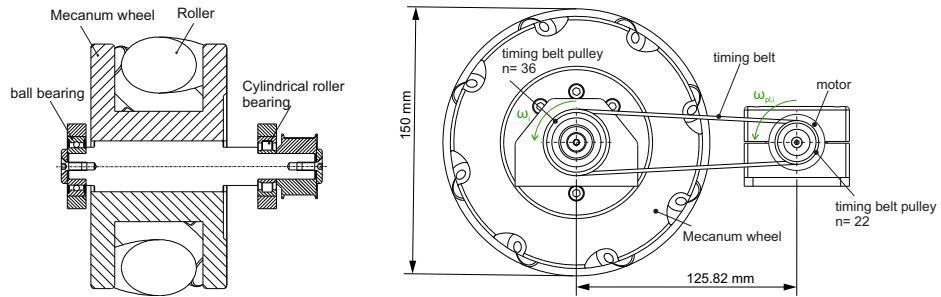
Mecanum wheels axis, bearings and drive unit overview.
